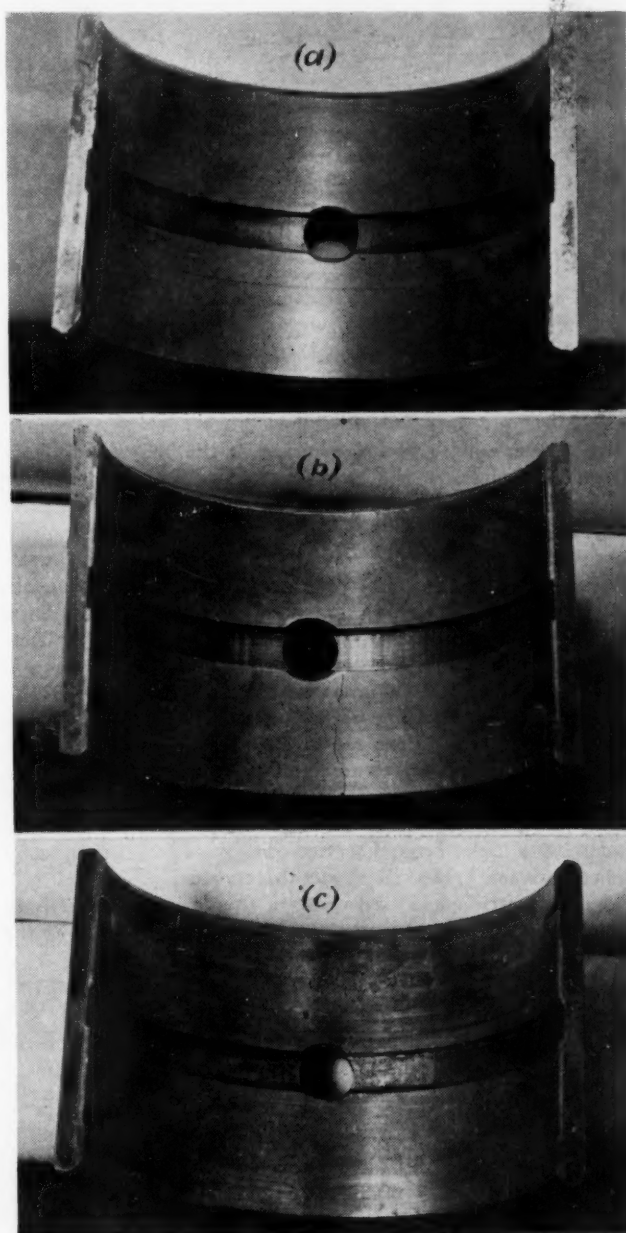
PROGRESS OF A BEARING FAILURE CAUSED BY EXCESSIVE LOCALIZED TEMPERATURE
